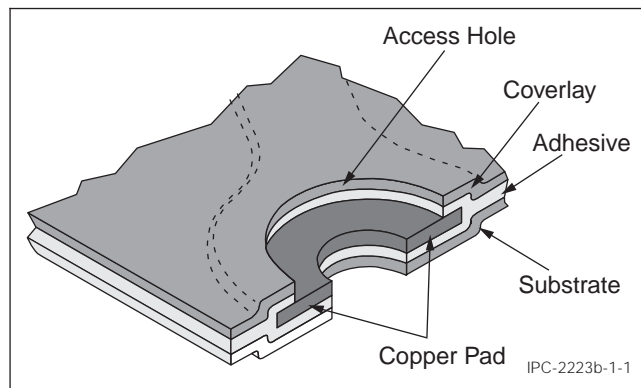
Type 1 Single-sided Flexible PB - Adhesive Substrate Construction
